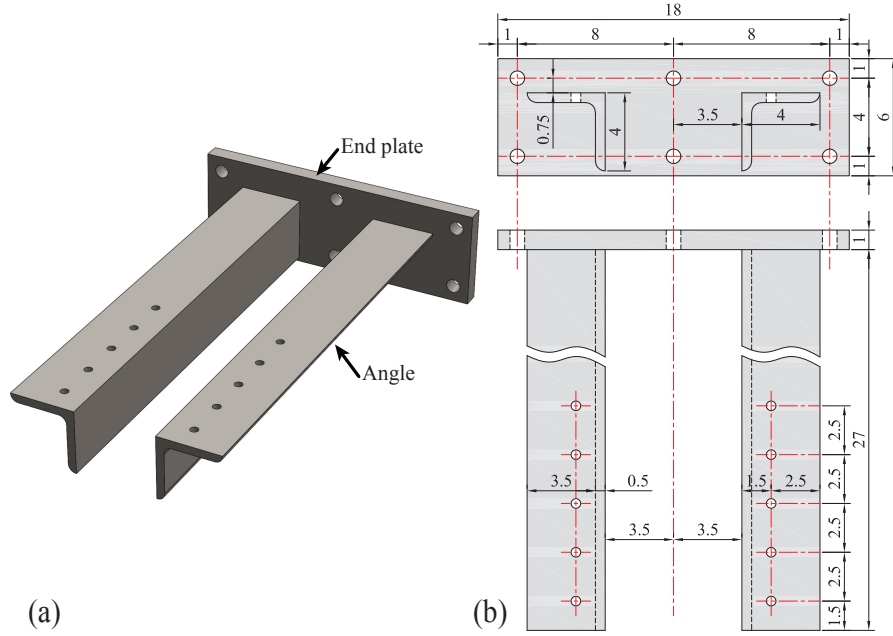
Design of the rail support: (a) perspective view and (b) top and front view (units: inch).
